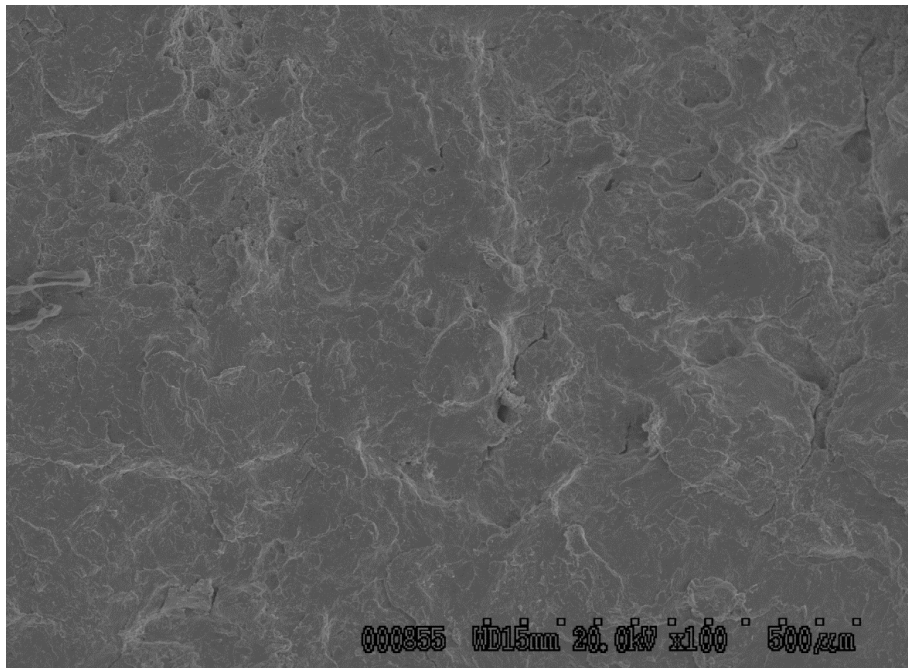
Scanning electron microscope fractograph of blade airfoil fracture surface at Area "856" shown in Fig. 283.
